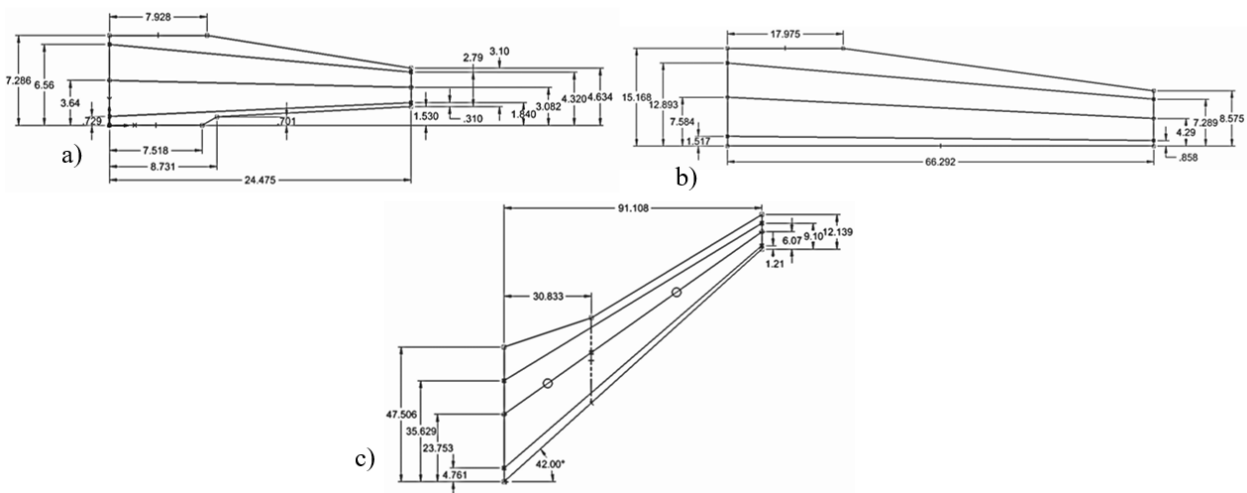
Wing dimension for all aircraft under study in feet a) King Air 350 Wing Dimensions [ft] b) King C-130 Wing Dimensions [ft] c) Boeing 747-400 Wing Dimensions [ft].
